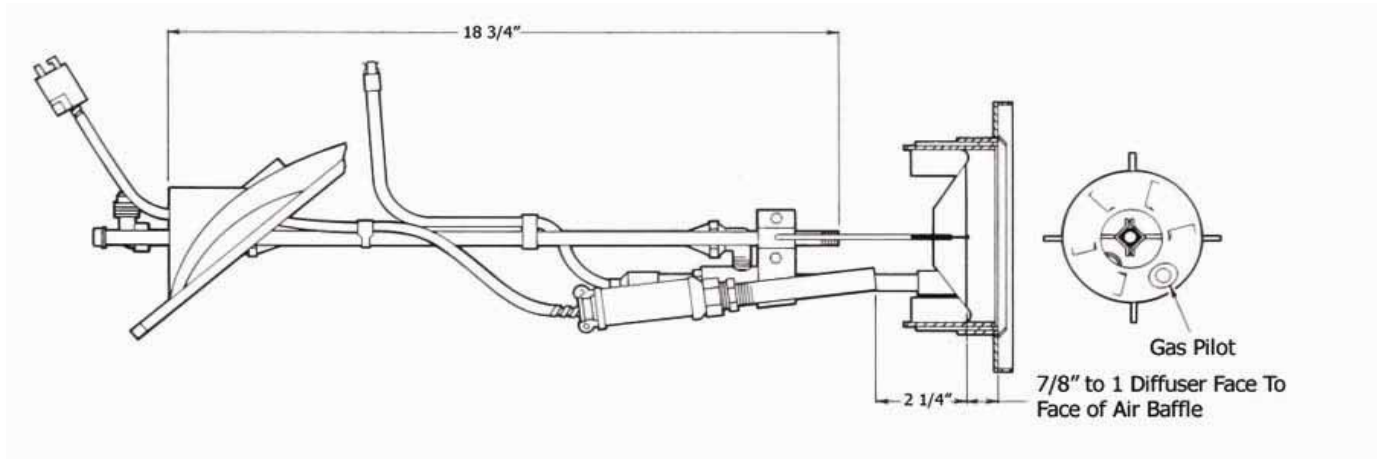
FPG 14, 17, & 20 Drawer Dimensions
